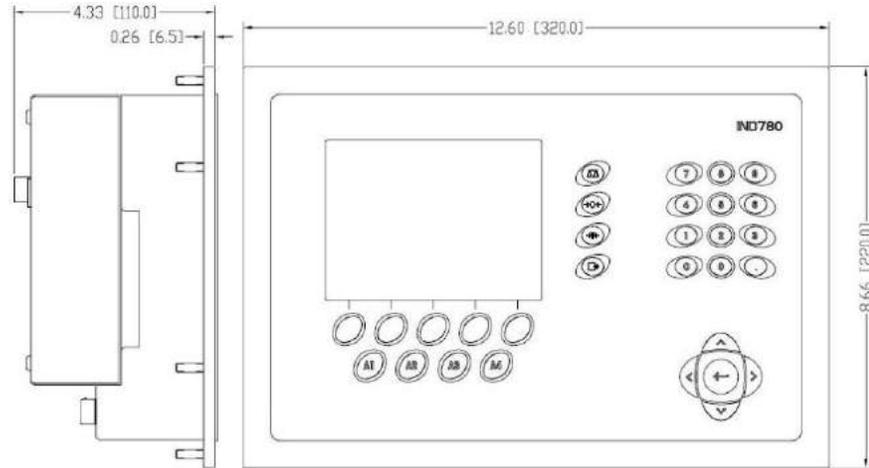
IND780 Panel Mount Enclosure Dimensions
